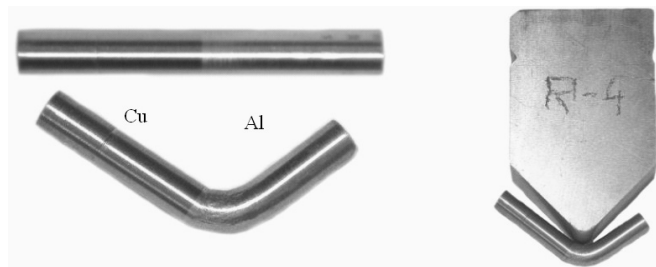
A view of a cold pressure welded Al-Cu sample before and after 90° bending test [4]
